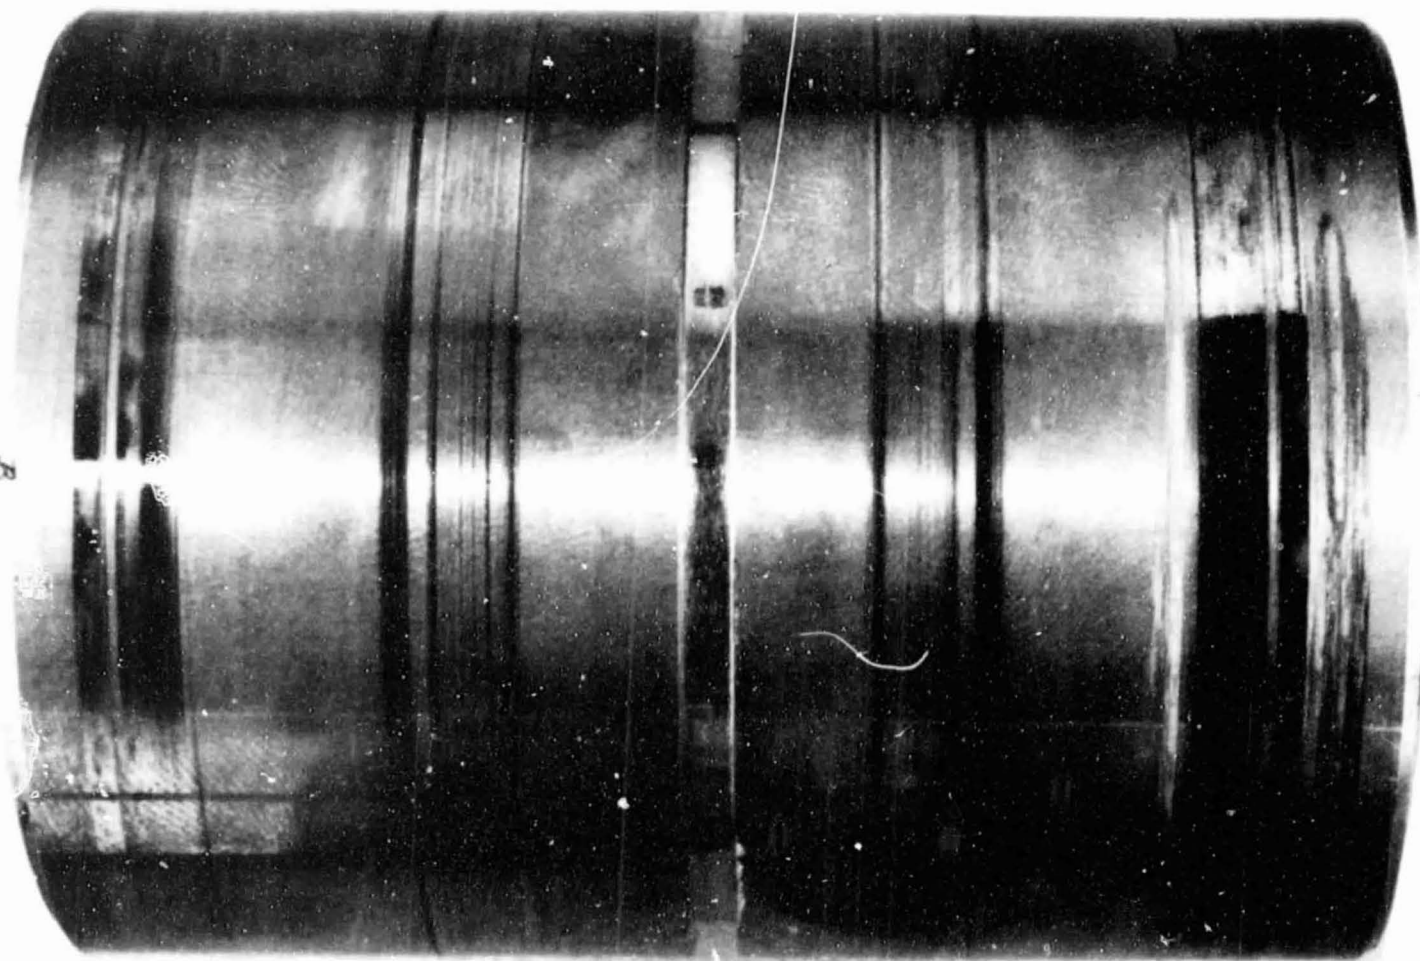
Turbine End Primary Seal Ring, P/N 99RS010303,
